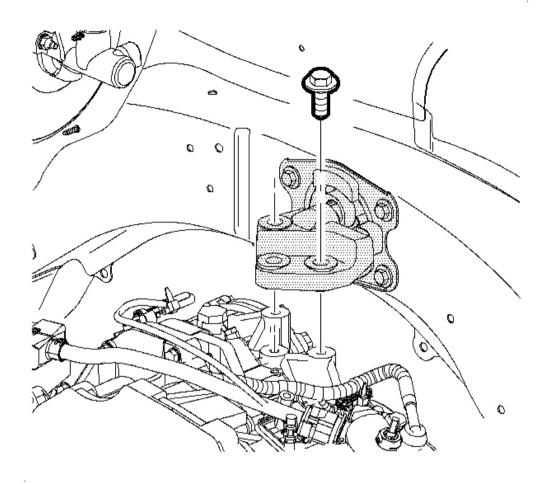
Left Transmission Mount & Bolts Courtesy of GENERAL MOTORS CORP.
